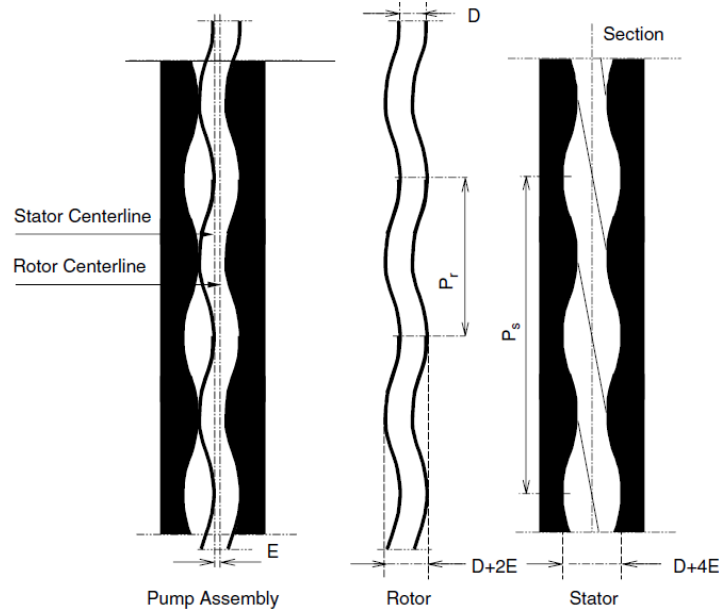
Rotor and stator geometry of PCP (Cholet, 2000)
